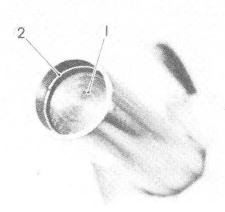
When disassembling the forks on YT 175/225 models, depress the spring seat (1) and remove the stopper ring (2) with a small screwdriver (Sec 5)
